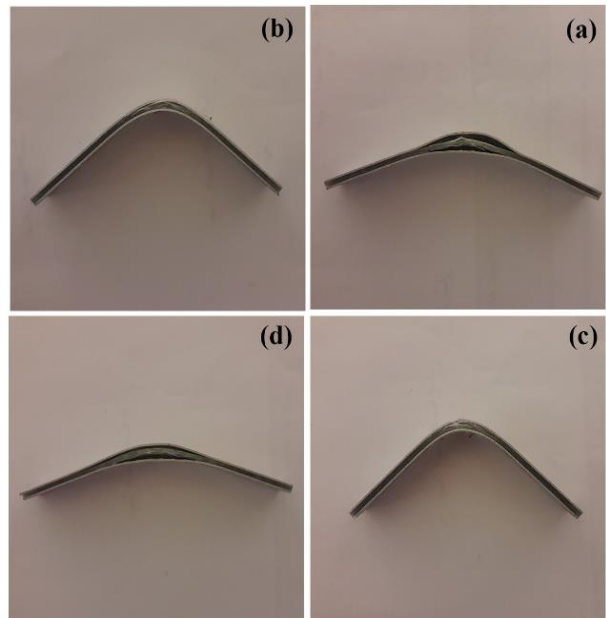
The fracture mechanism in, a) 1W, b) 1W5, c) 2W, d) 2W5 samples after impact test at -45 °C
